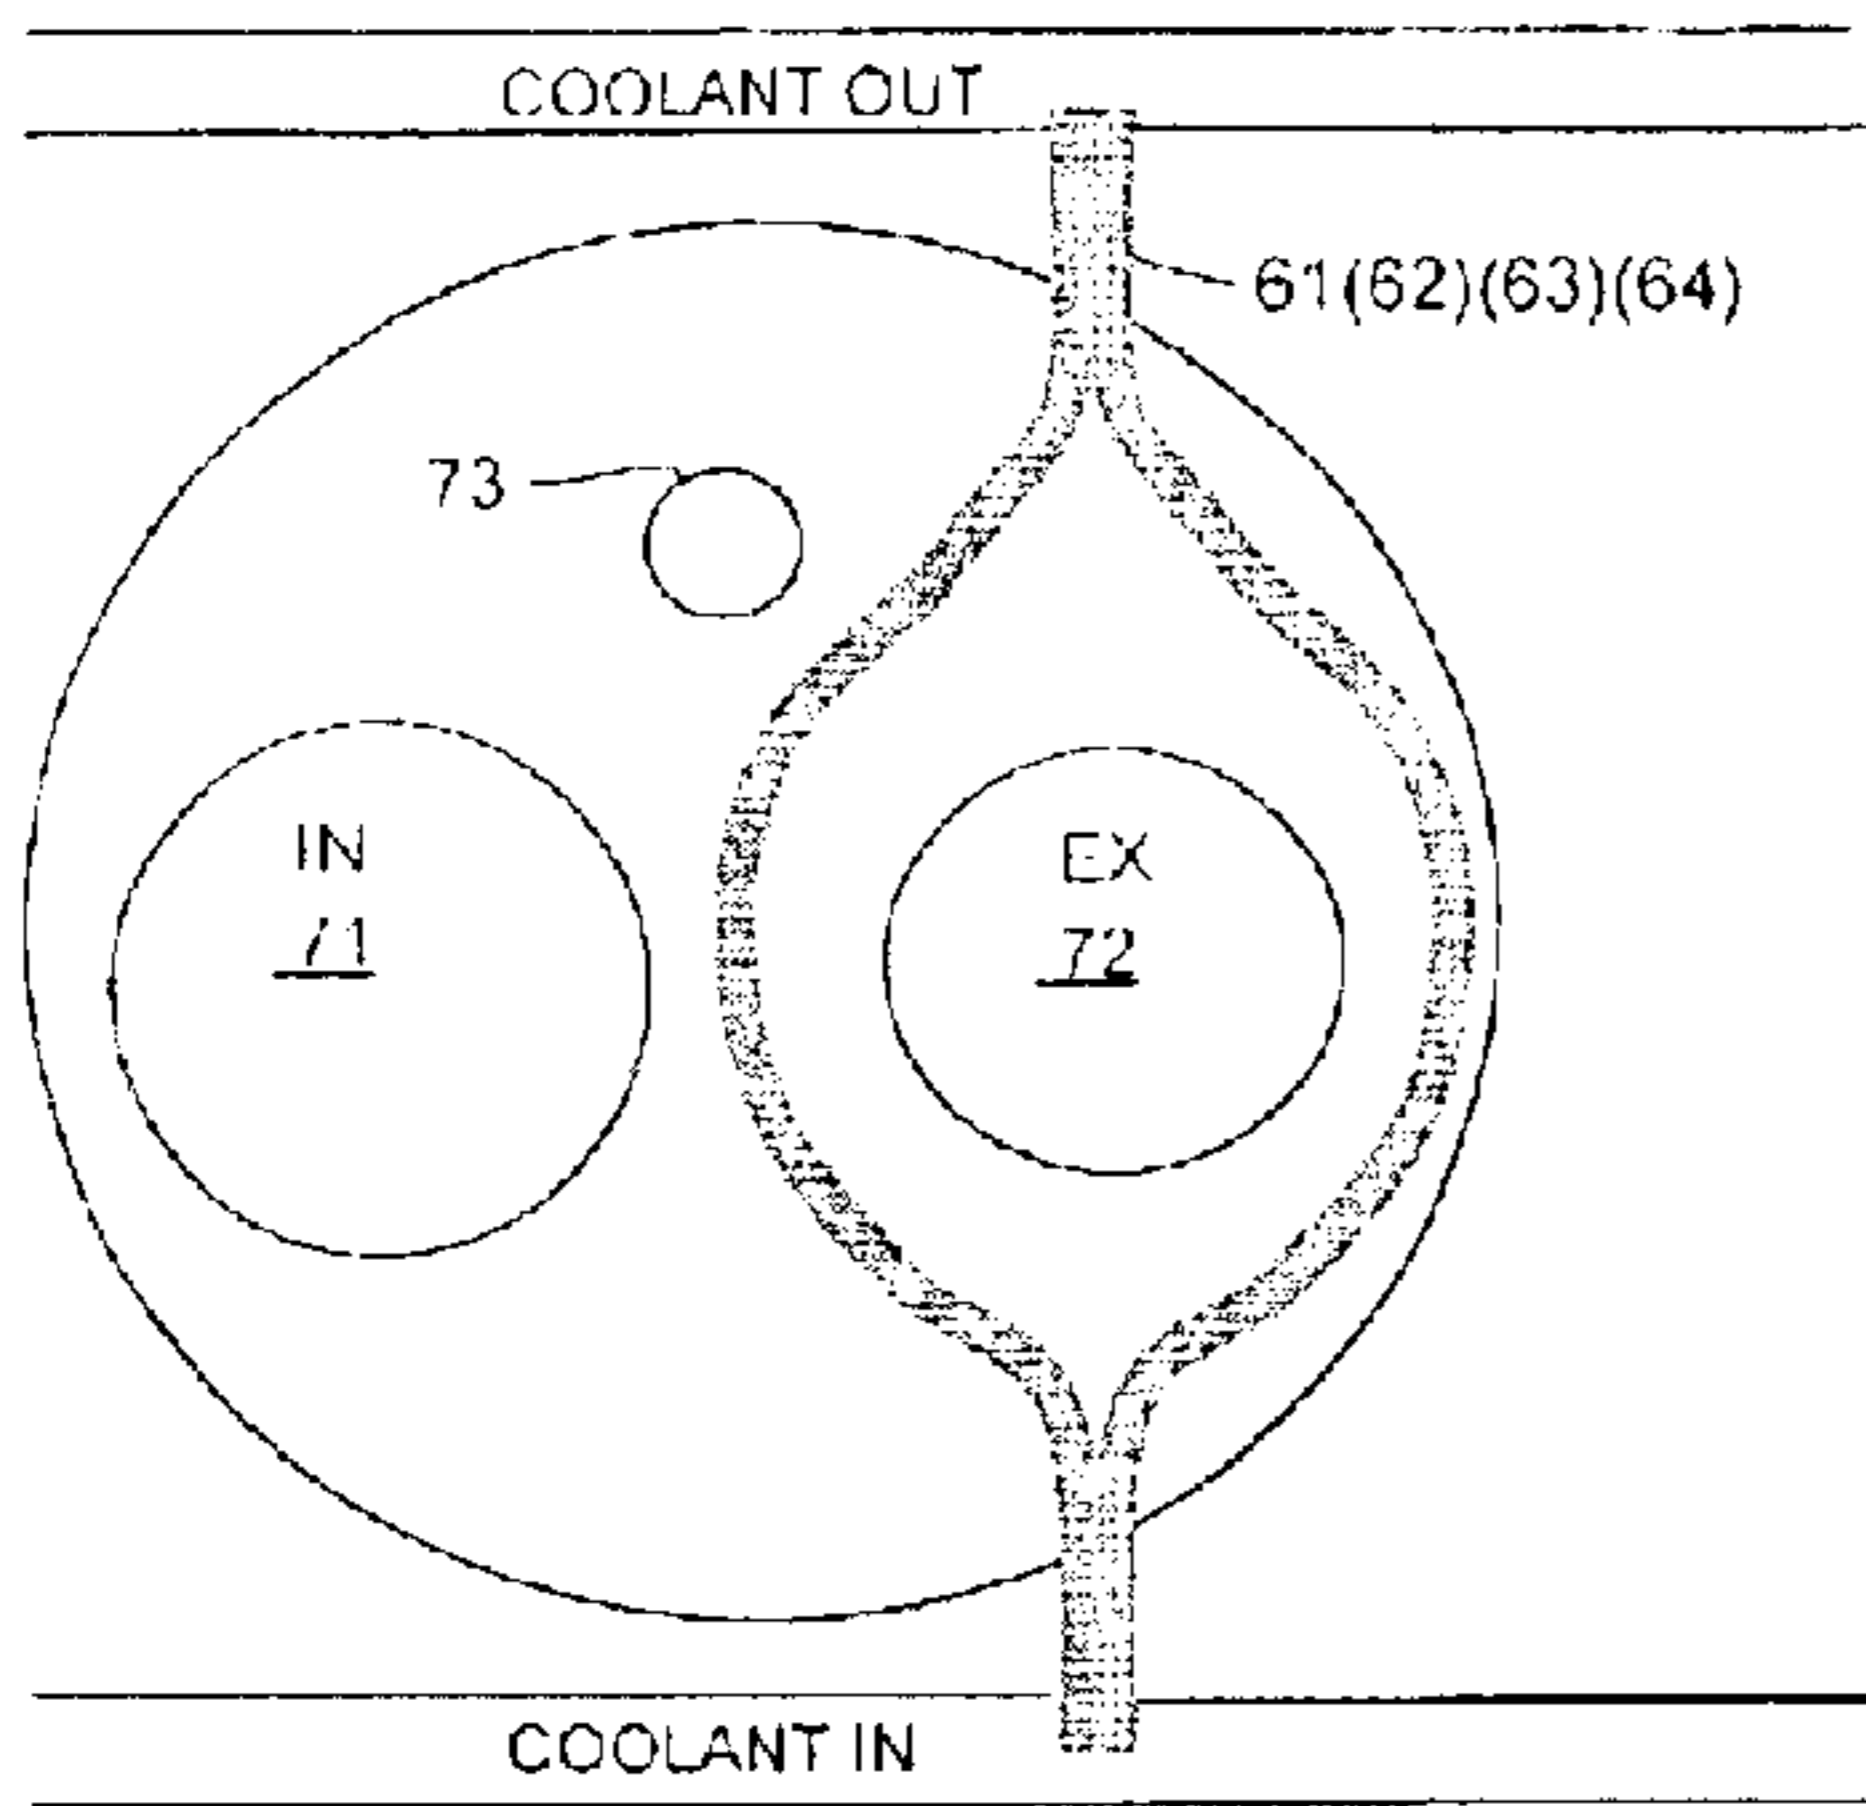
Cooling the Exhaust Valve and the Spark Plug
